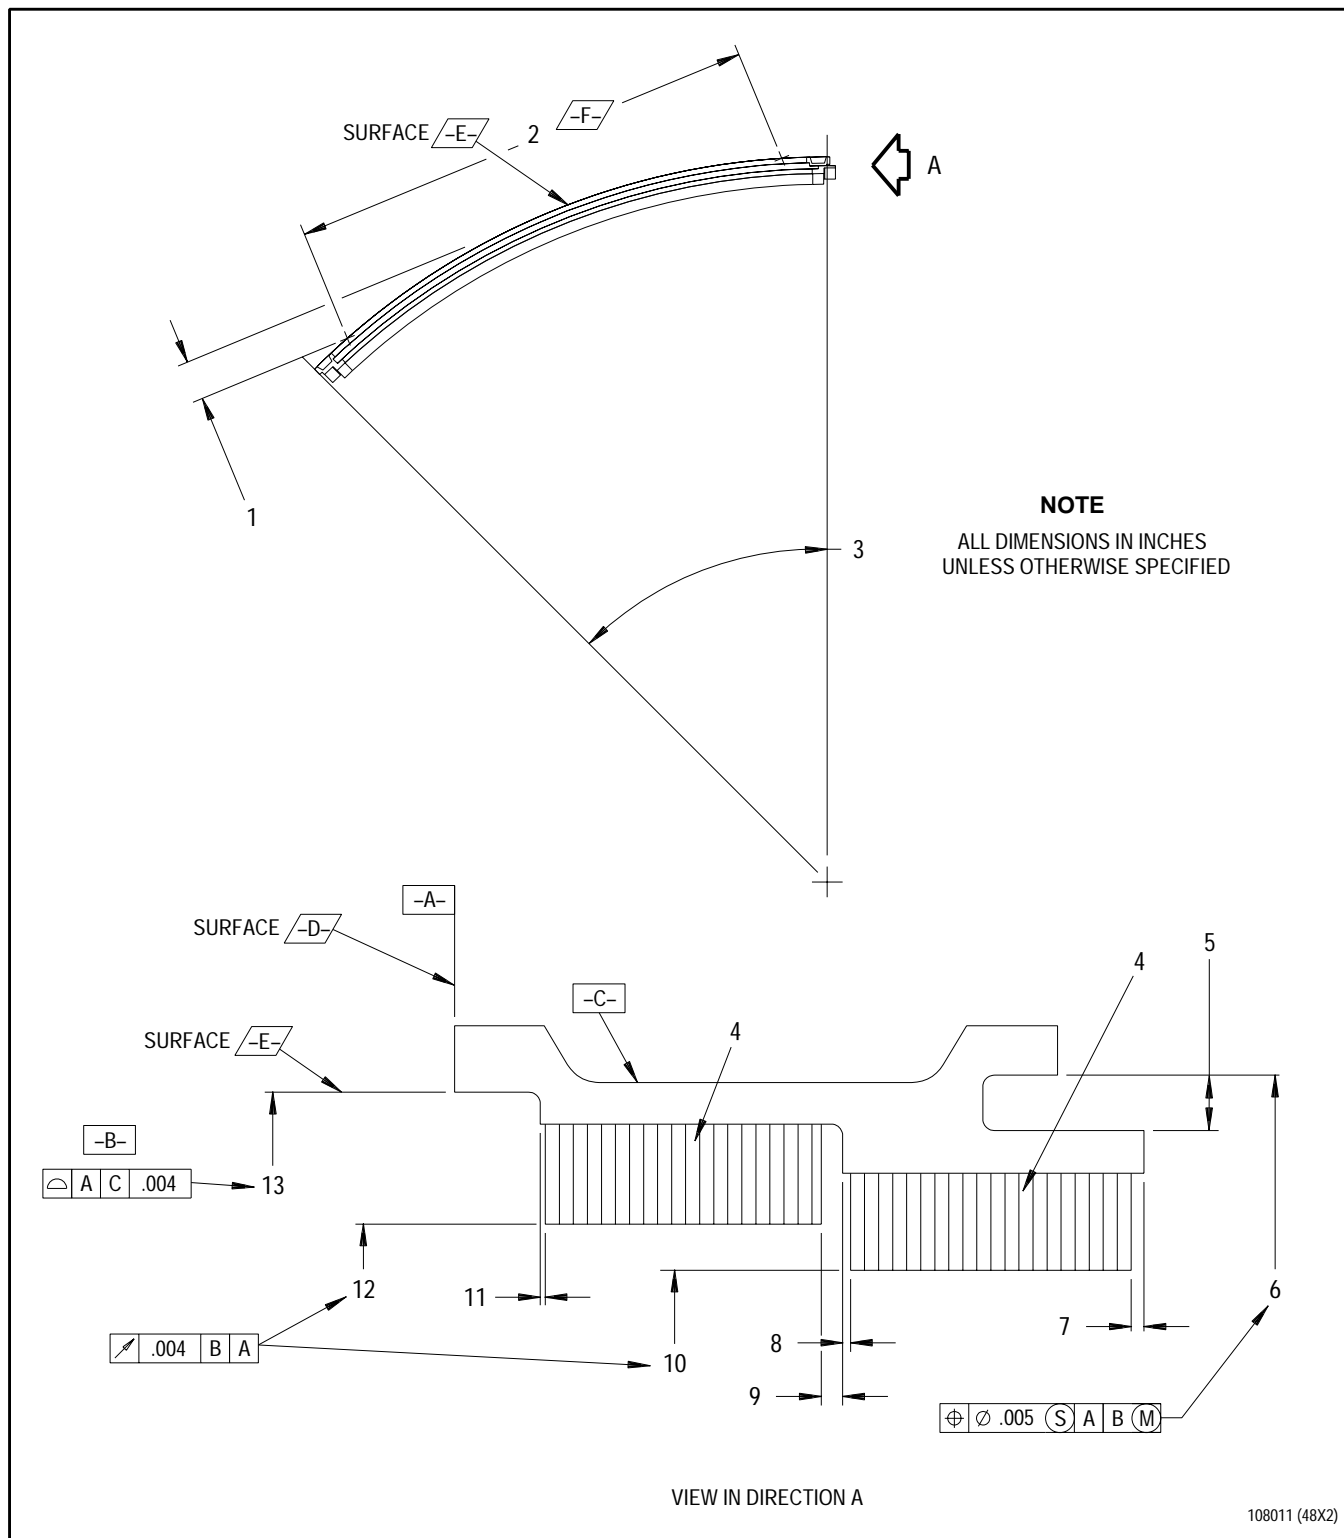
Seventh Through Ninth Stage Compressor Stator Shroud Assemblies - Finish Dimensions
